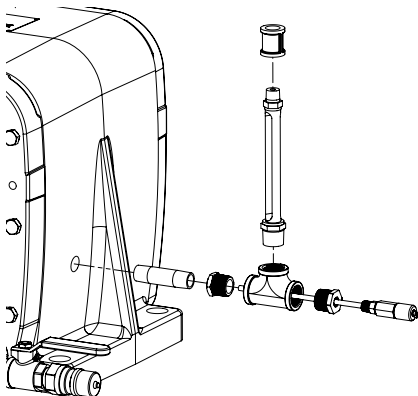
Oil Sampling Pitot Tube and Sight Tube Components
